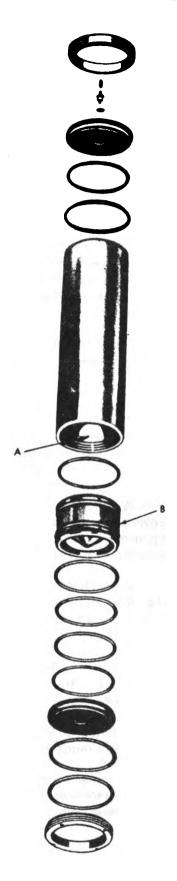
Hydraulic (main) accumulator disassembly or assembly (2 of 2).
